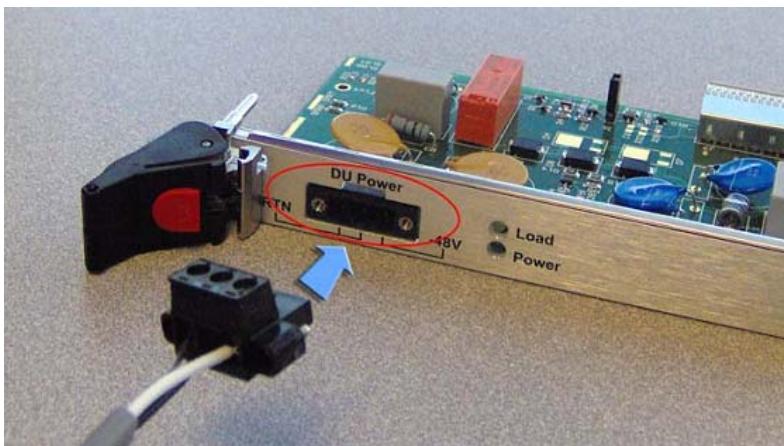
Plugging the DC Power Plug Into the PoE Card
